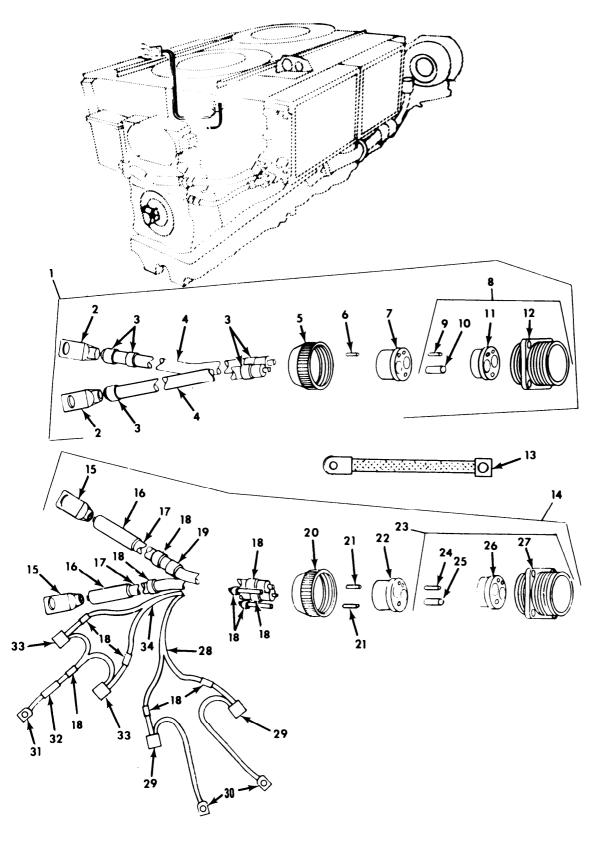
STARTER WIRING HARNESS ASSEMBLY.
